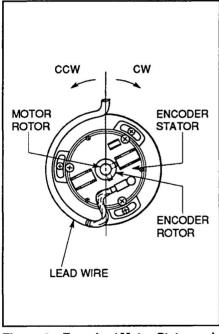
Encoder / Motor Stator and Rotor Configuration.
